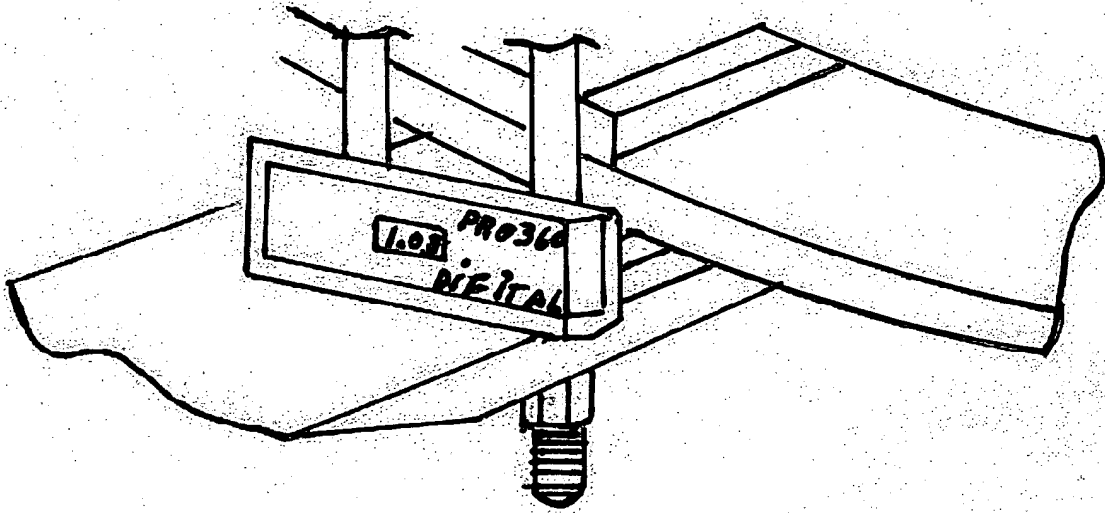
CHECKING SPRING BUSHING TO "U" BOLT
